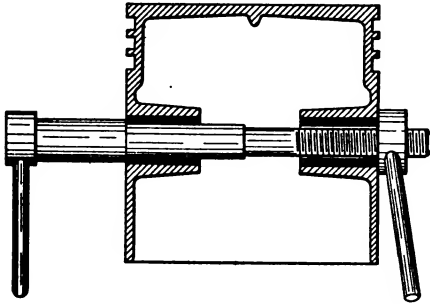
Piston Pin Bushing with Shouldered Mandrel
